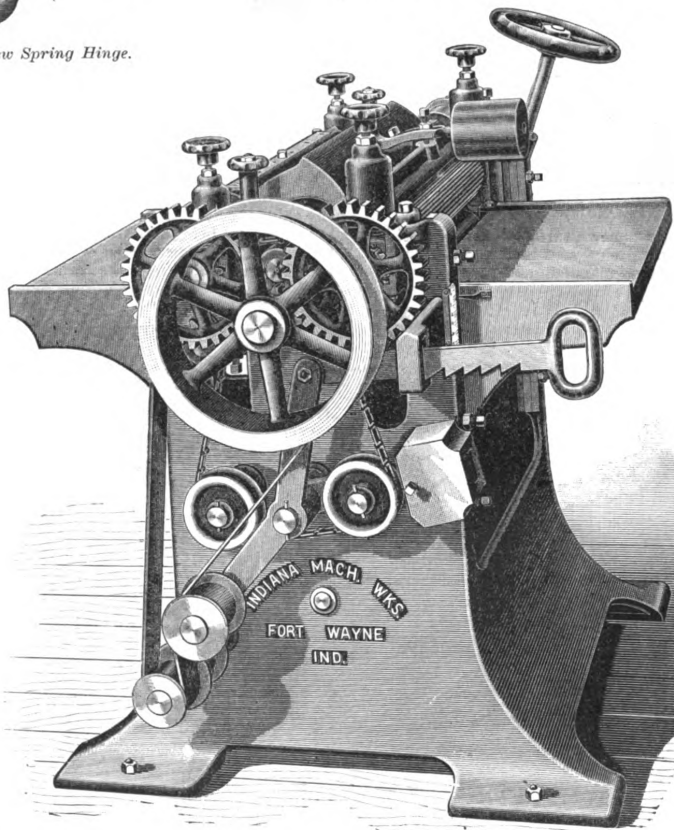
Improved Pony Planer and Smoother, Built by the Indiana Machine Works.
